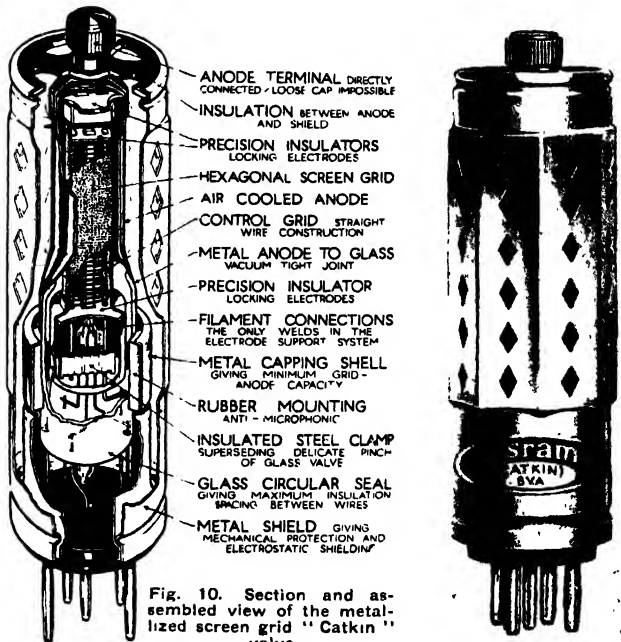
Section and assembled view of the metalized screen grid "Catkin" valve.
